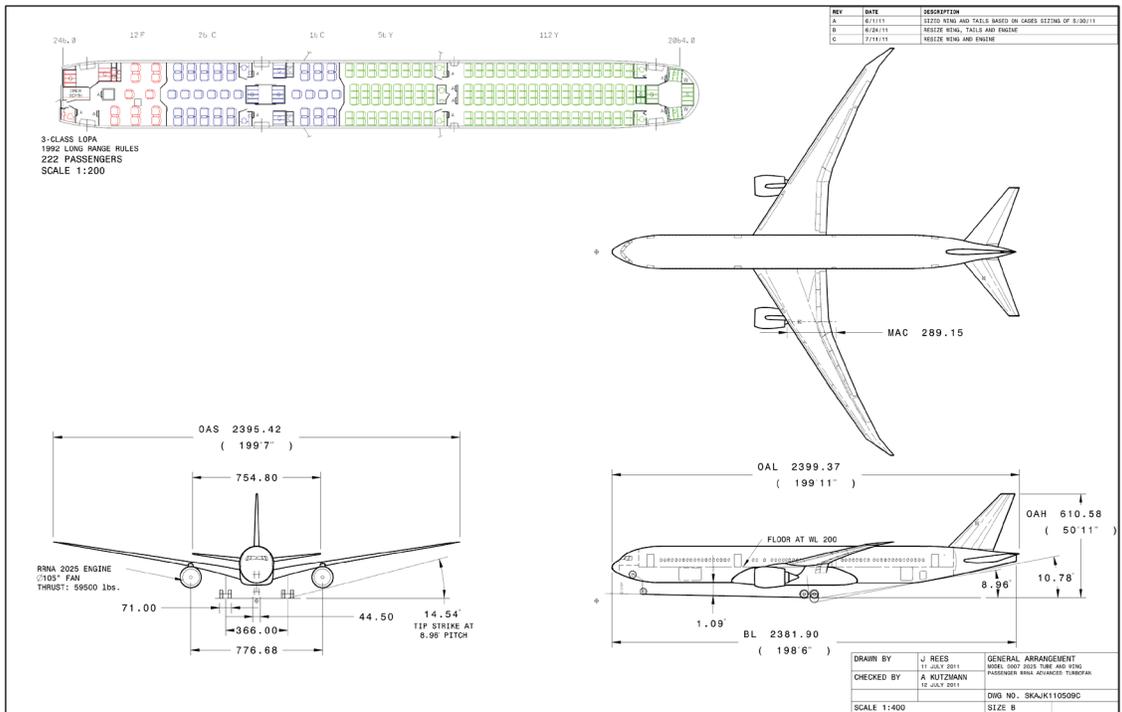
General Arrangement Drawing – 2025 T&W-0007 Passenger
